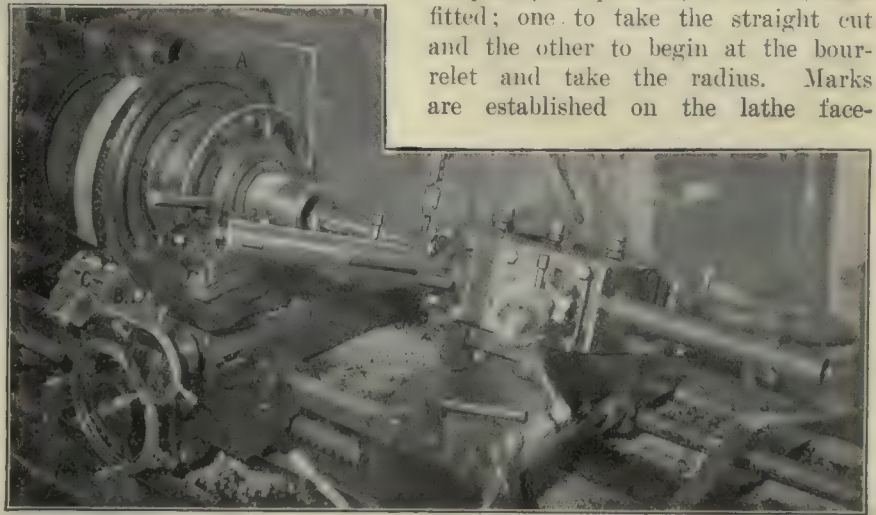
GISHOLT LATHE FITTED FOR PERFORMING OPERATION 3
